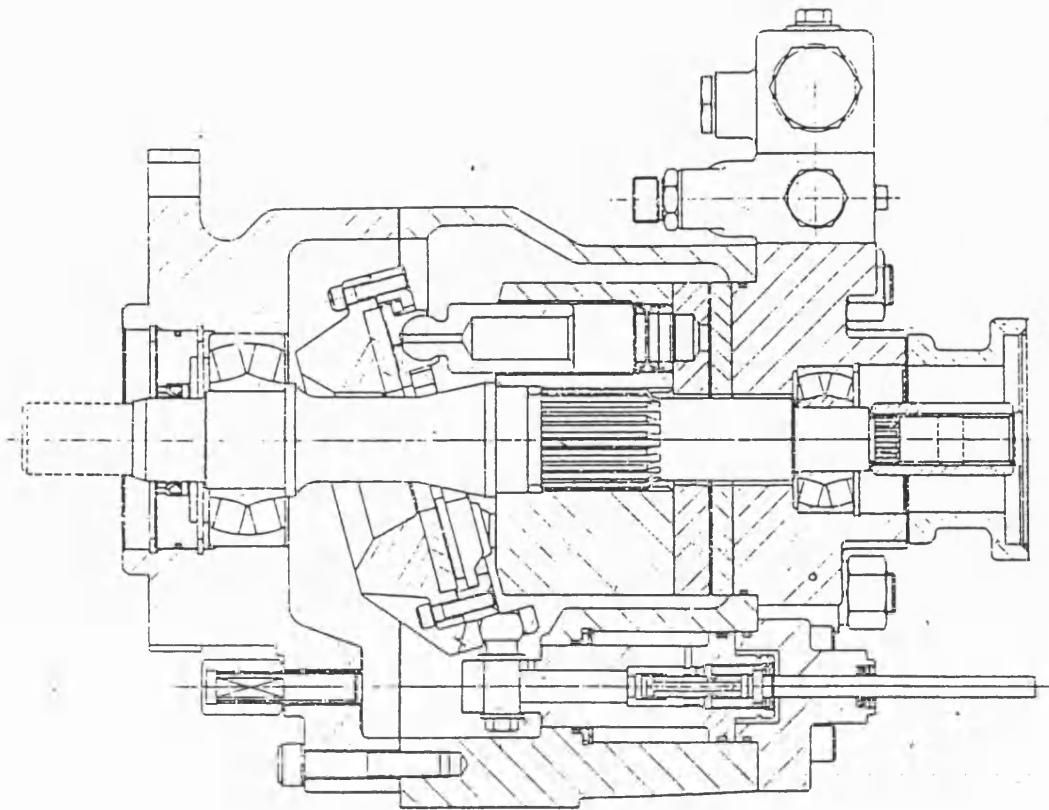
COMMERCIAL AXIAL PISTON MOTOR
